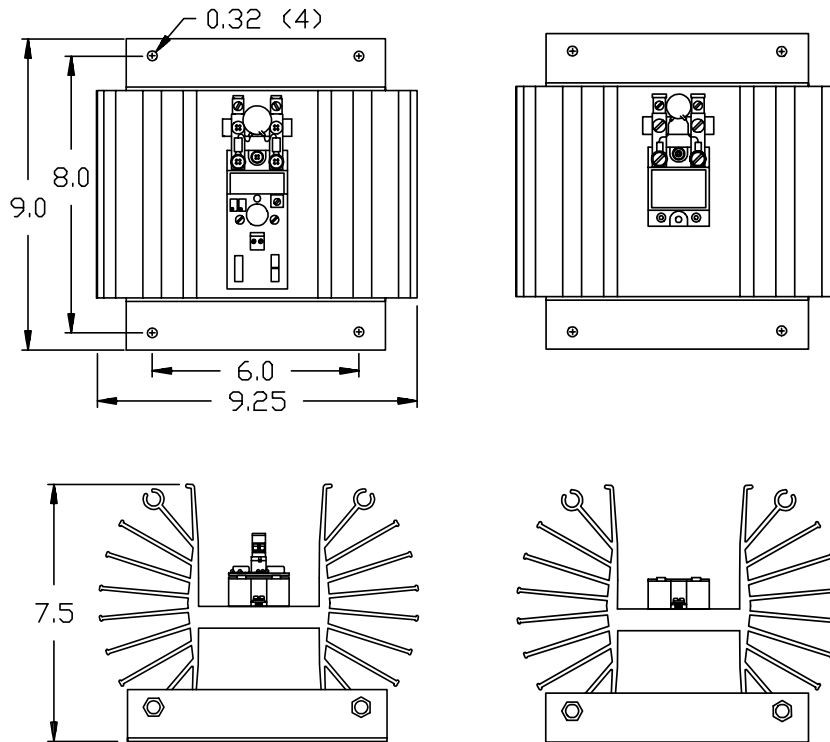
70 AMP (BOTH ASSEMBLIES REQUIRED)
